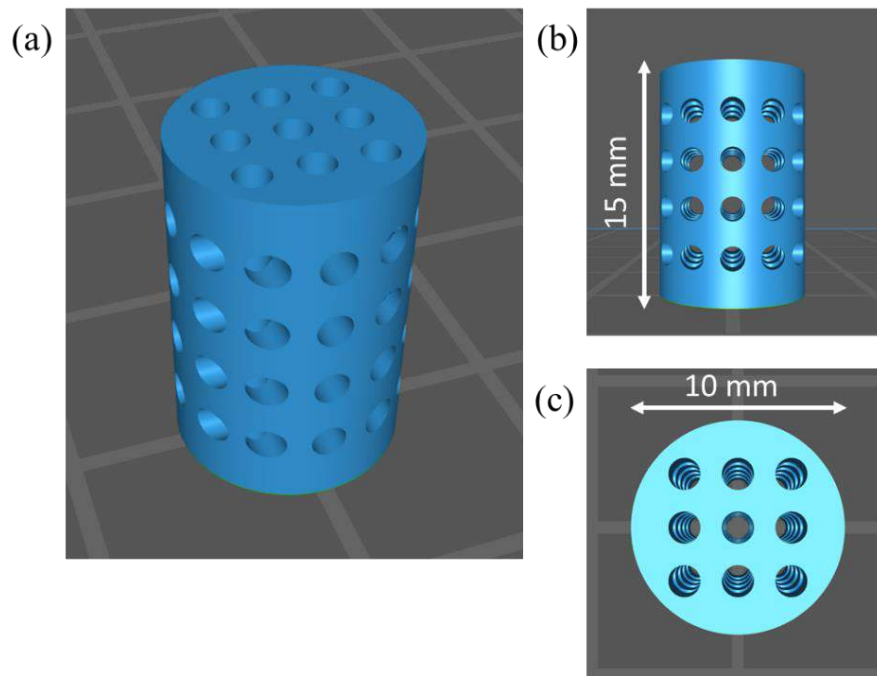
3D model used to print the HA parts: (a) perspective, (b) front view, (c) top view.
